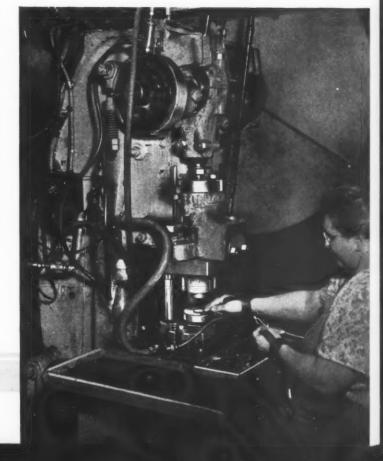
Carbide Die Set up for Drawing Steel Rings from Flat Blanks at the Rate of 1200 per Hour
